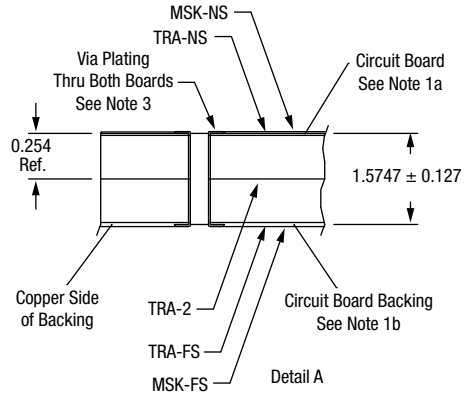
SKY65006-348LF Evaluation Board Assembly Drawing
